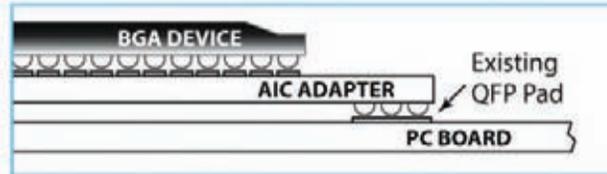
A series of solder balls are applied to the bottom of the adapter/interposer, in the same pattern as the QFP footprint using a patented process. Existing board inventory is maintained, and processing issues caused by fragile leads are eliminated.
